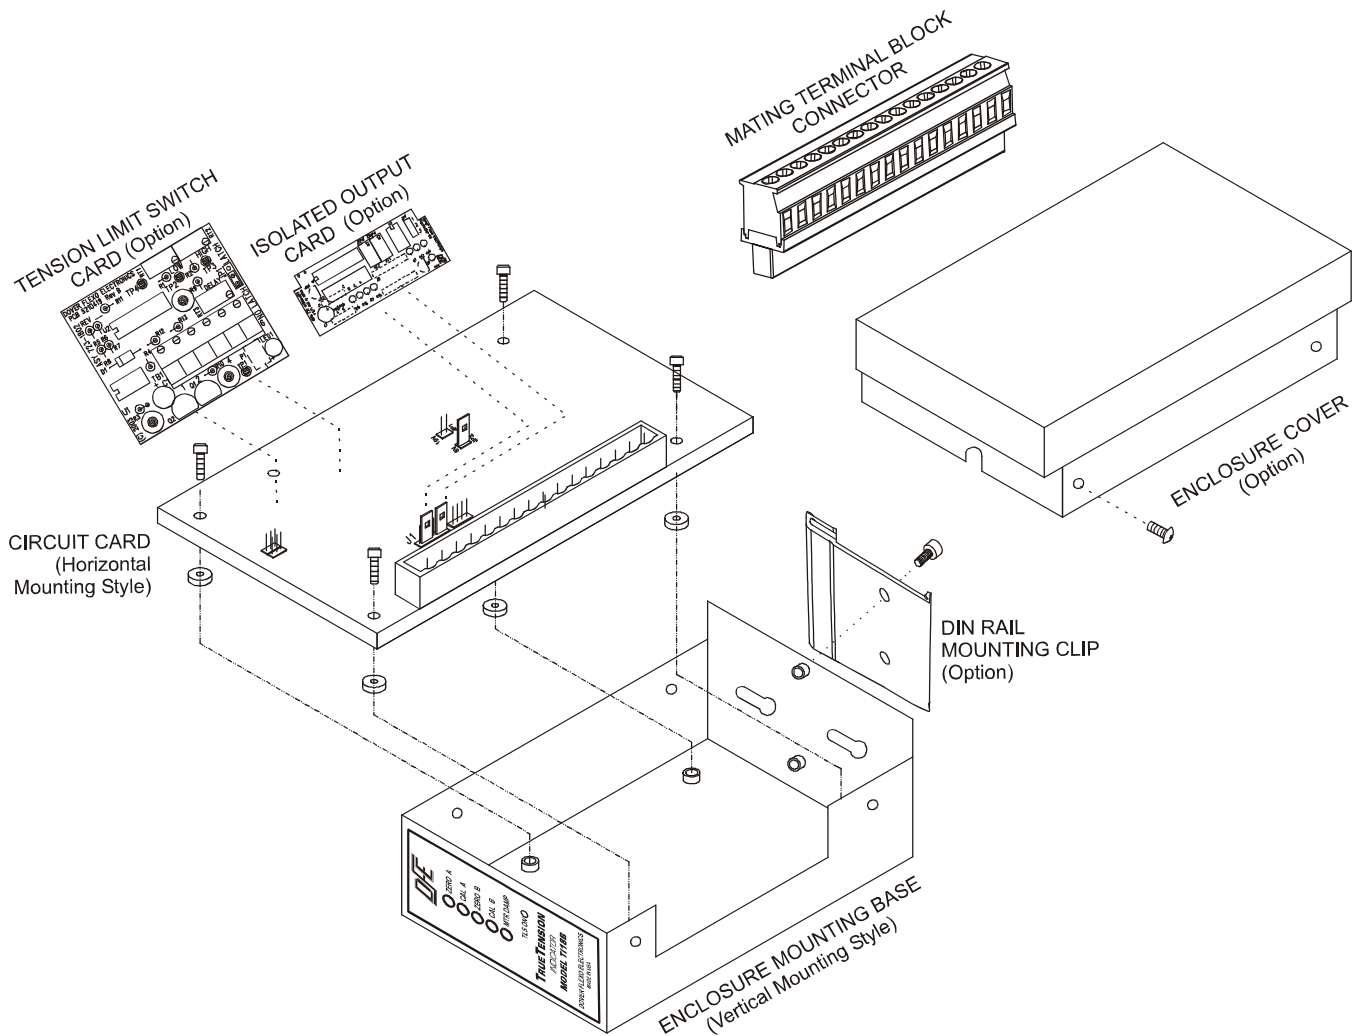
EXPLODED VIEW OF TI17B and/or TI18B
